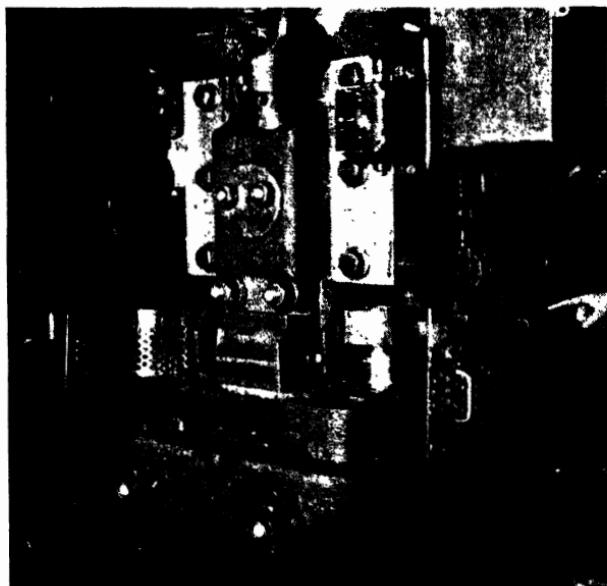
Push-button remote control on a punch press. (*Courtesy of the Ford Motor Company.*)
